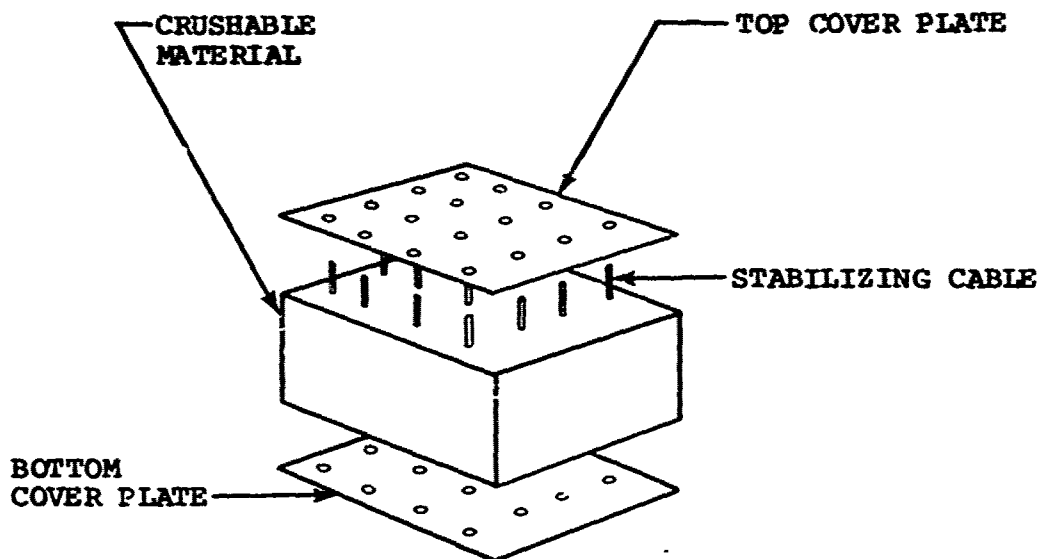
Crushable Seat Base (Modified Honeycomb) - Concept 2.
